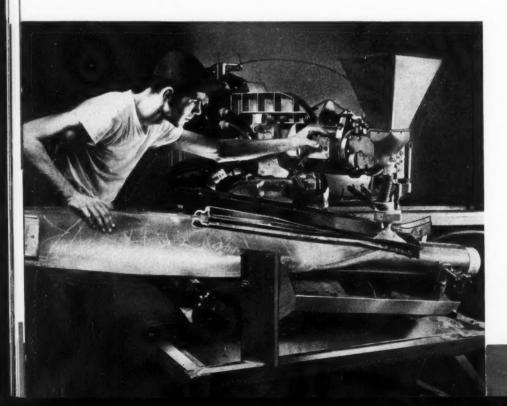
After Welding of Trail and Lead Edges, Shank Seam is Welded by Unionmelt Process
